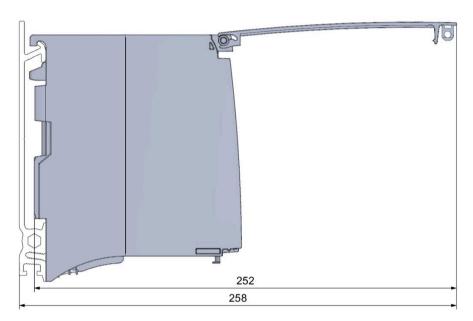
Dimension drawing of the DQ 64x24VDC/0.3A BA module, side view with open front cover
